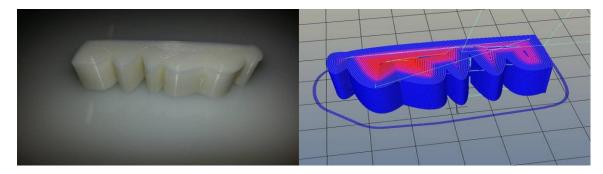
Prototype of Fracture Bone (Shakil, 2014).
